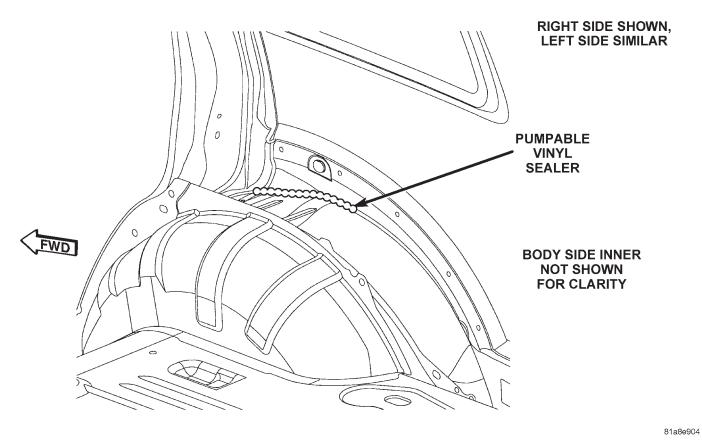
REAR WHEELHOUSE OUTER AND BODY SIDE OUTER
